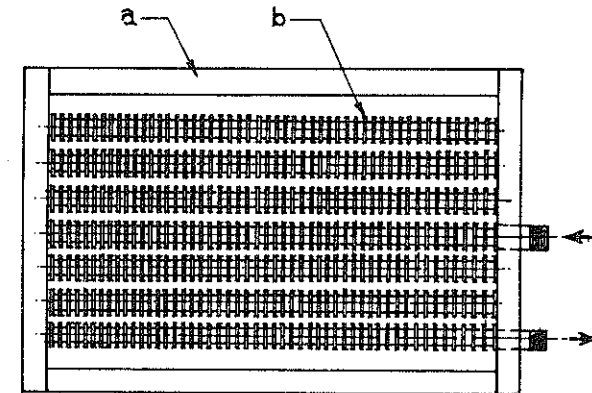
Finned tube heat exchanger (a) box (b) finned tubes
